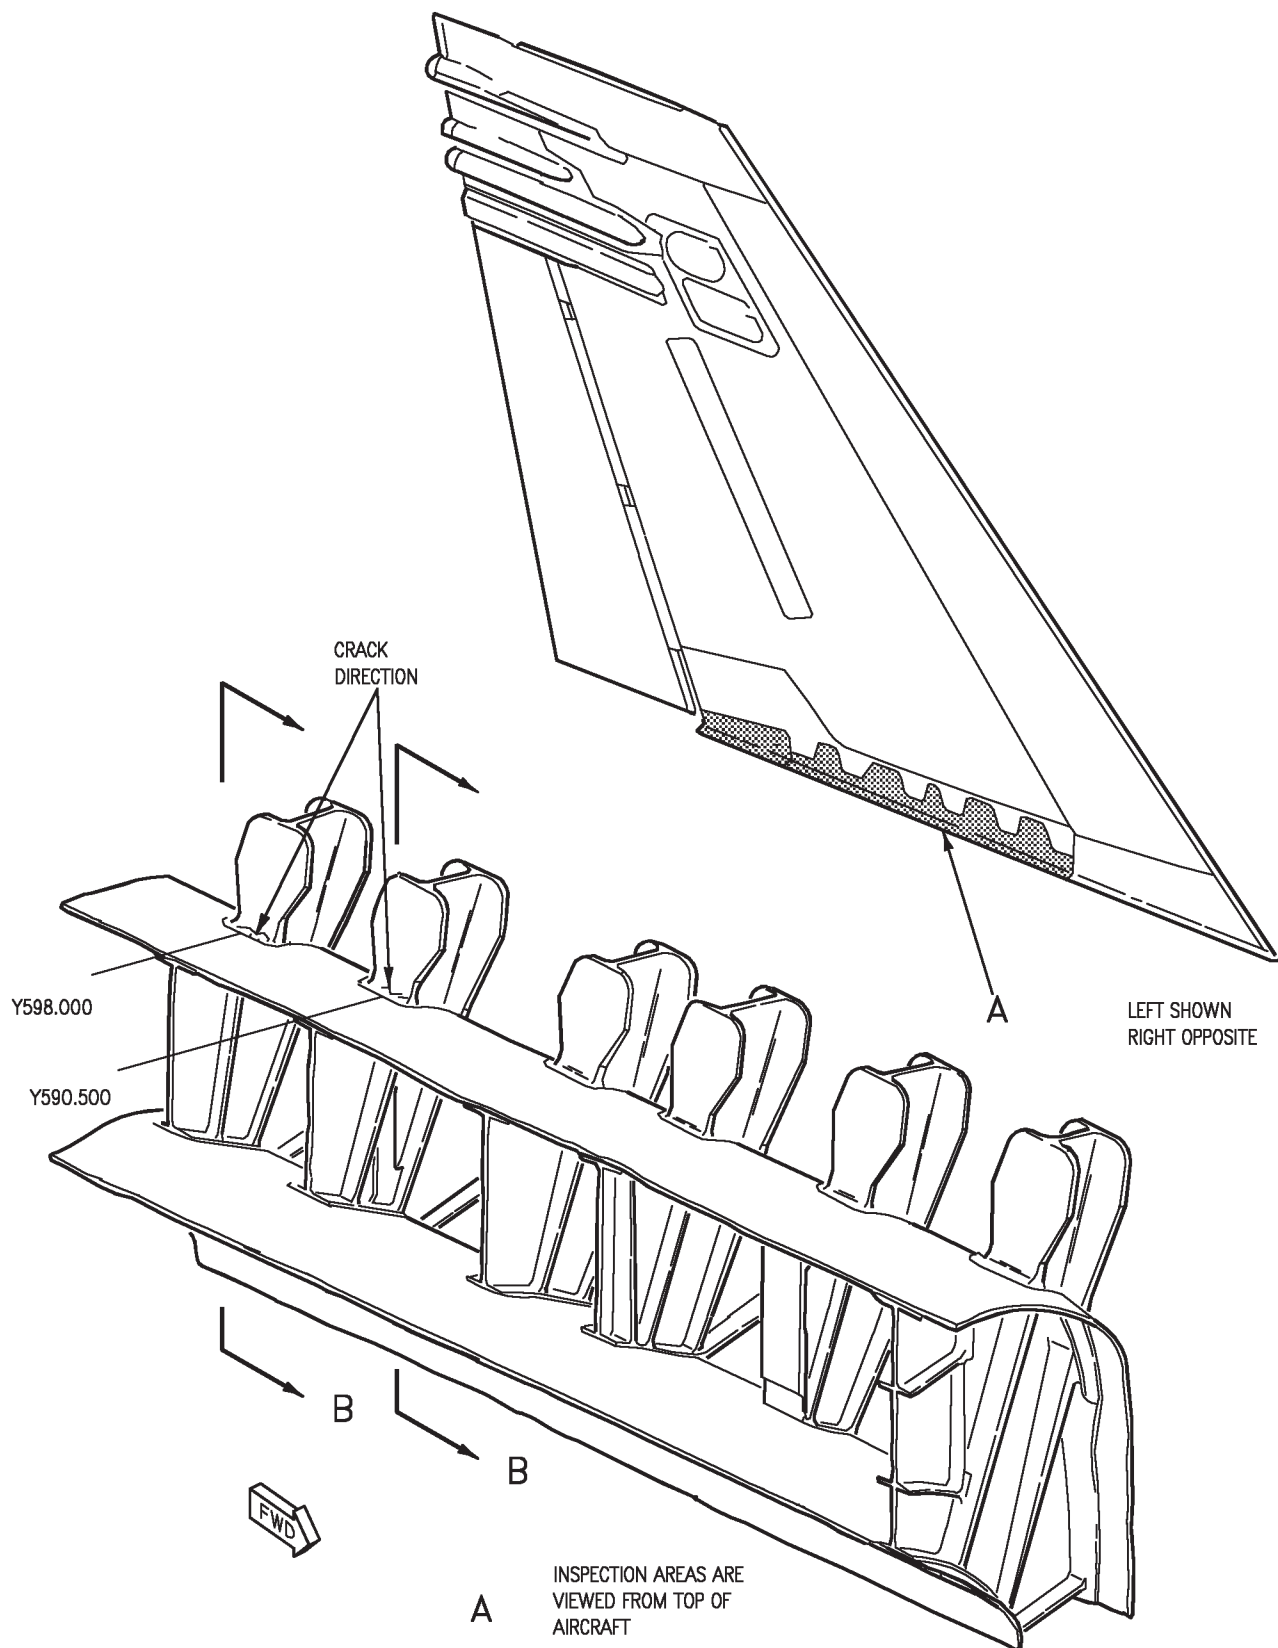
Location of Formers and Inspection Areas (Sheet 1)
